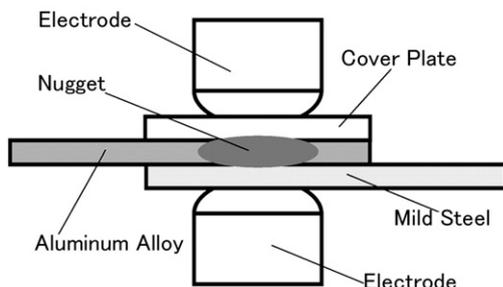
Schematic diagram of resistance spot welding with cover plate.
